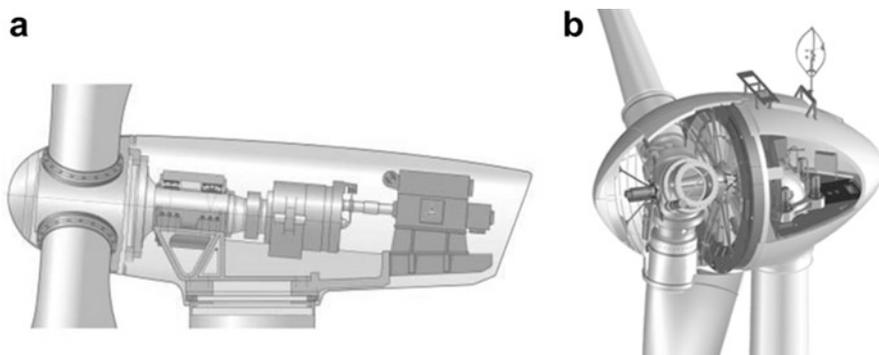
Typical turbine driveline configurations. (a) Gearbox and (b) Direct-drive generator
